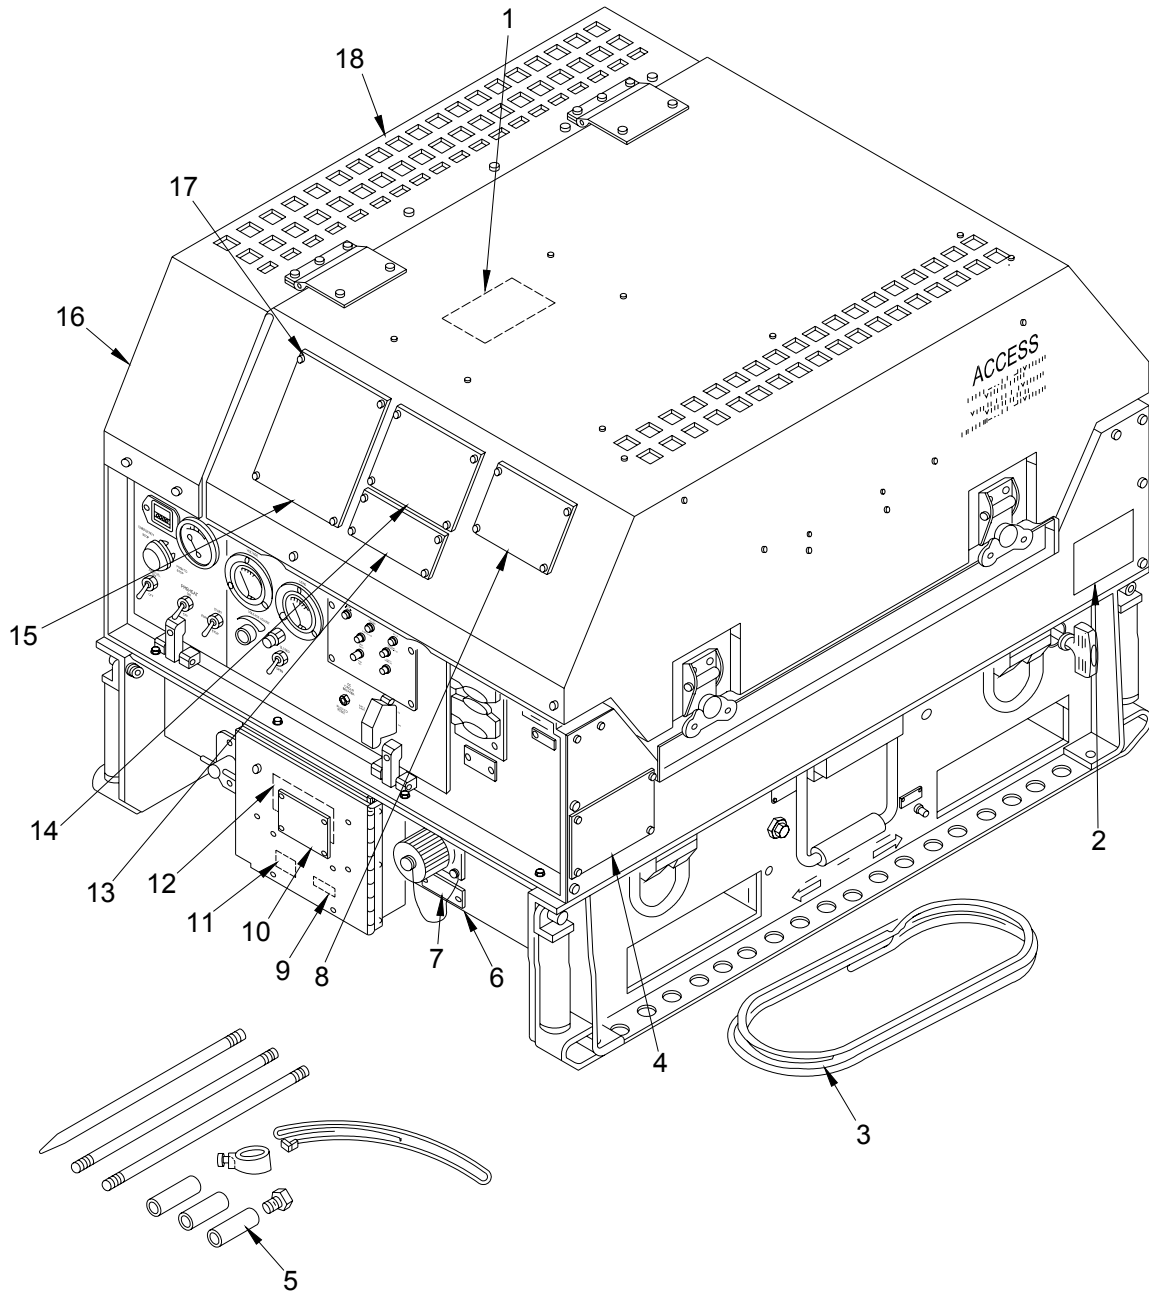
FRAME AND HOUSING ASSEMBLY/ID PLATES
